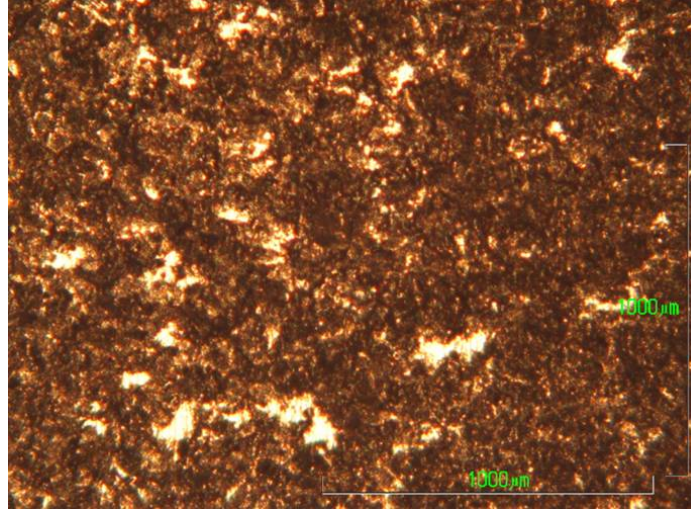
Bottom fracture surface of UAM 1-1 sample 1 showing nearly complete surface deformation due to contact with the horn.
